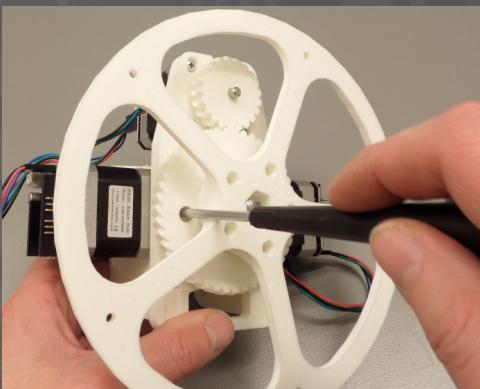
Now mount the secondary gear side plate with motor using the screws added on figure 9.
